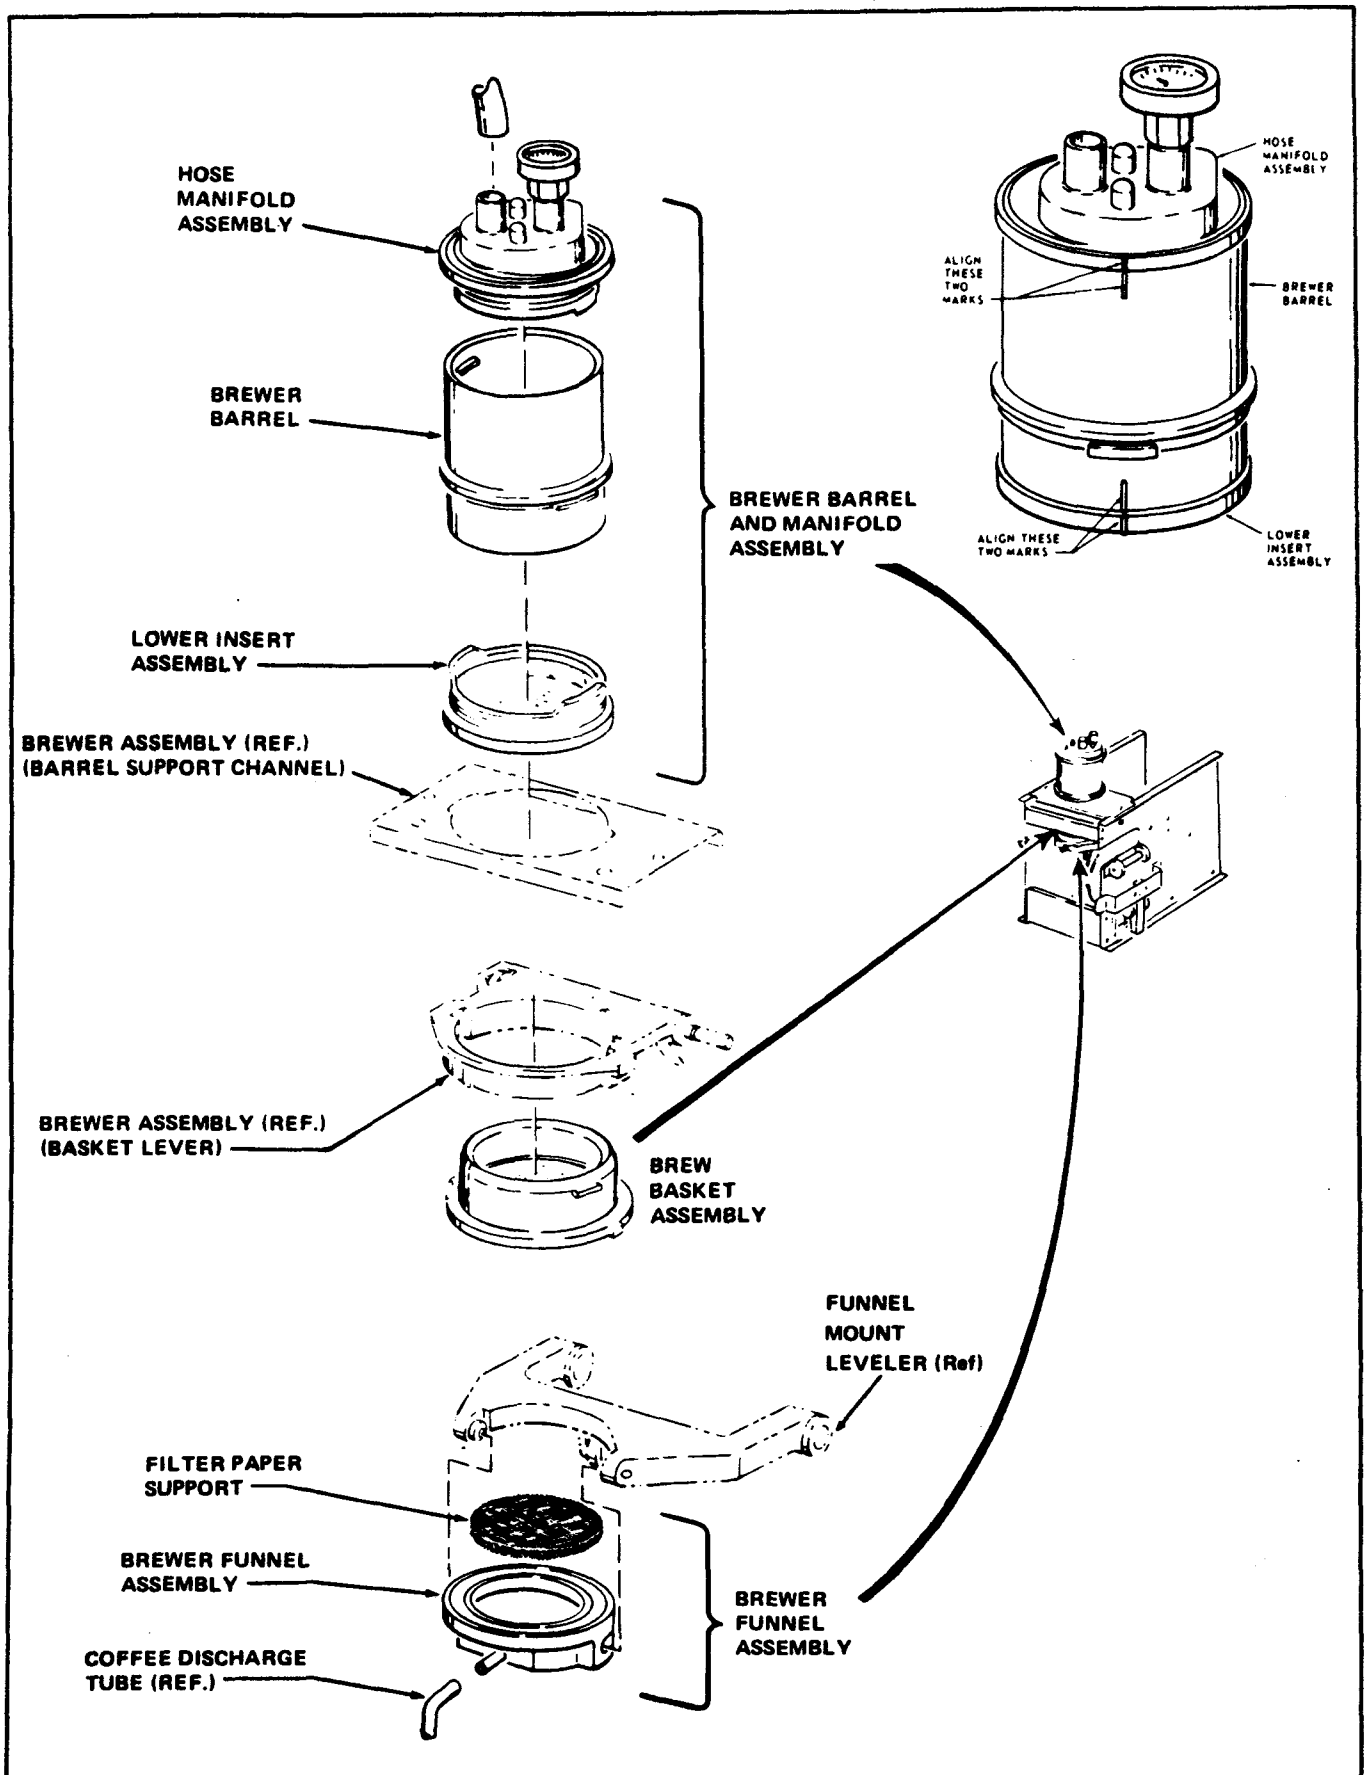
Brewer Barrel, Manifold, Basket, and Funnel Assembly
